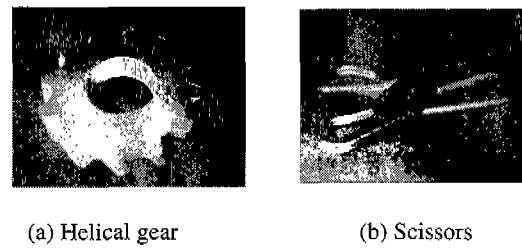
Fabricated shape of a helical gear and a scissors using VLM-S
